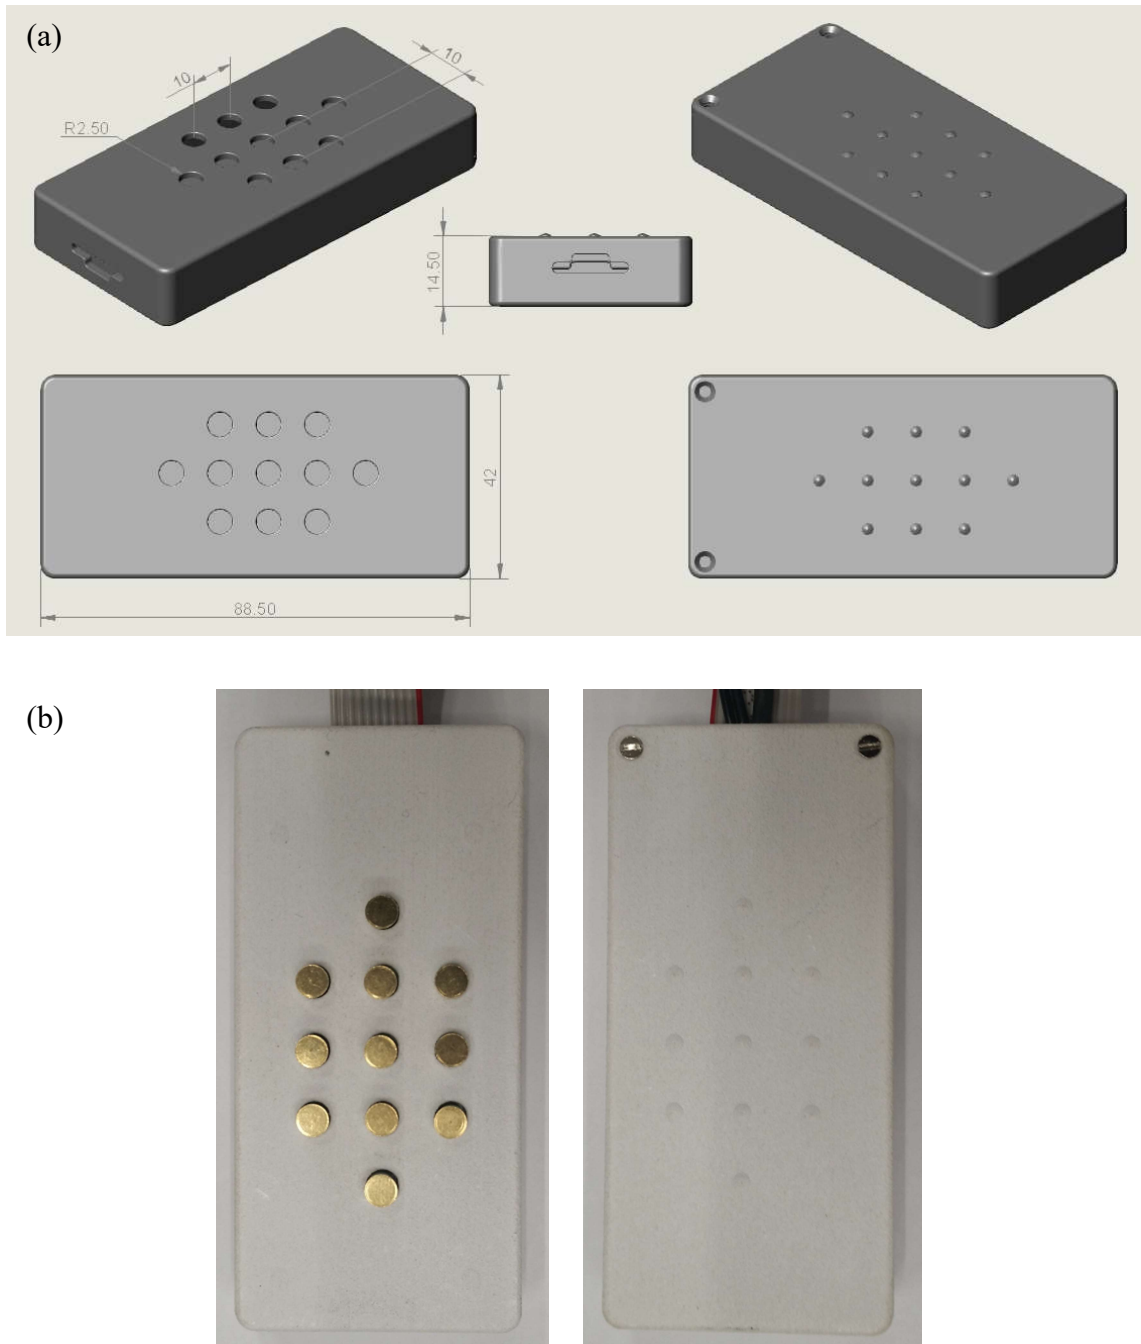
(a) SolidWorks drawings. (b) Final assembly of the multi-channel electrode unit.
